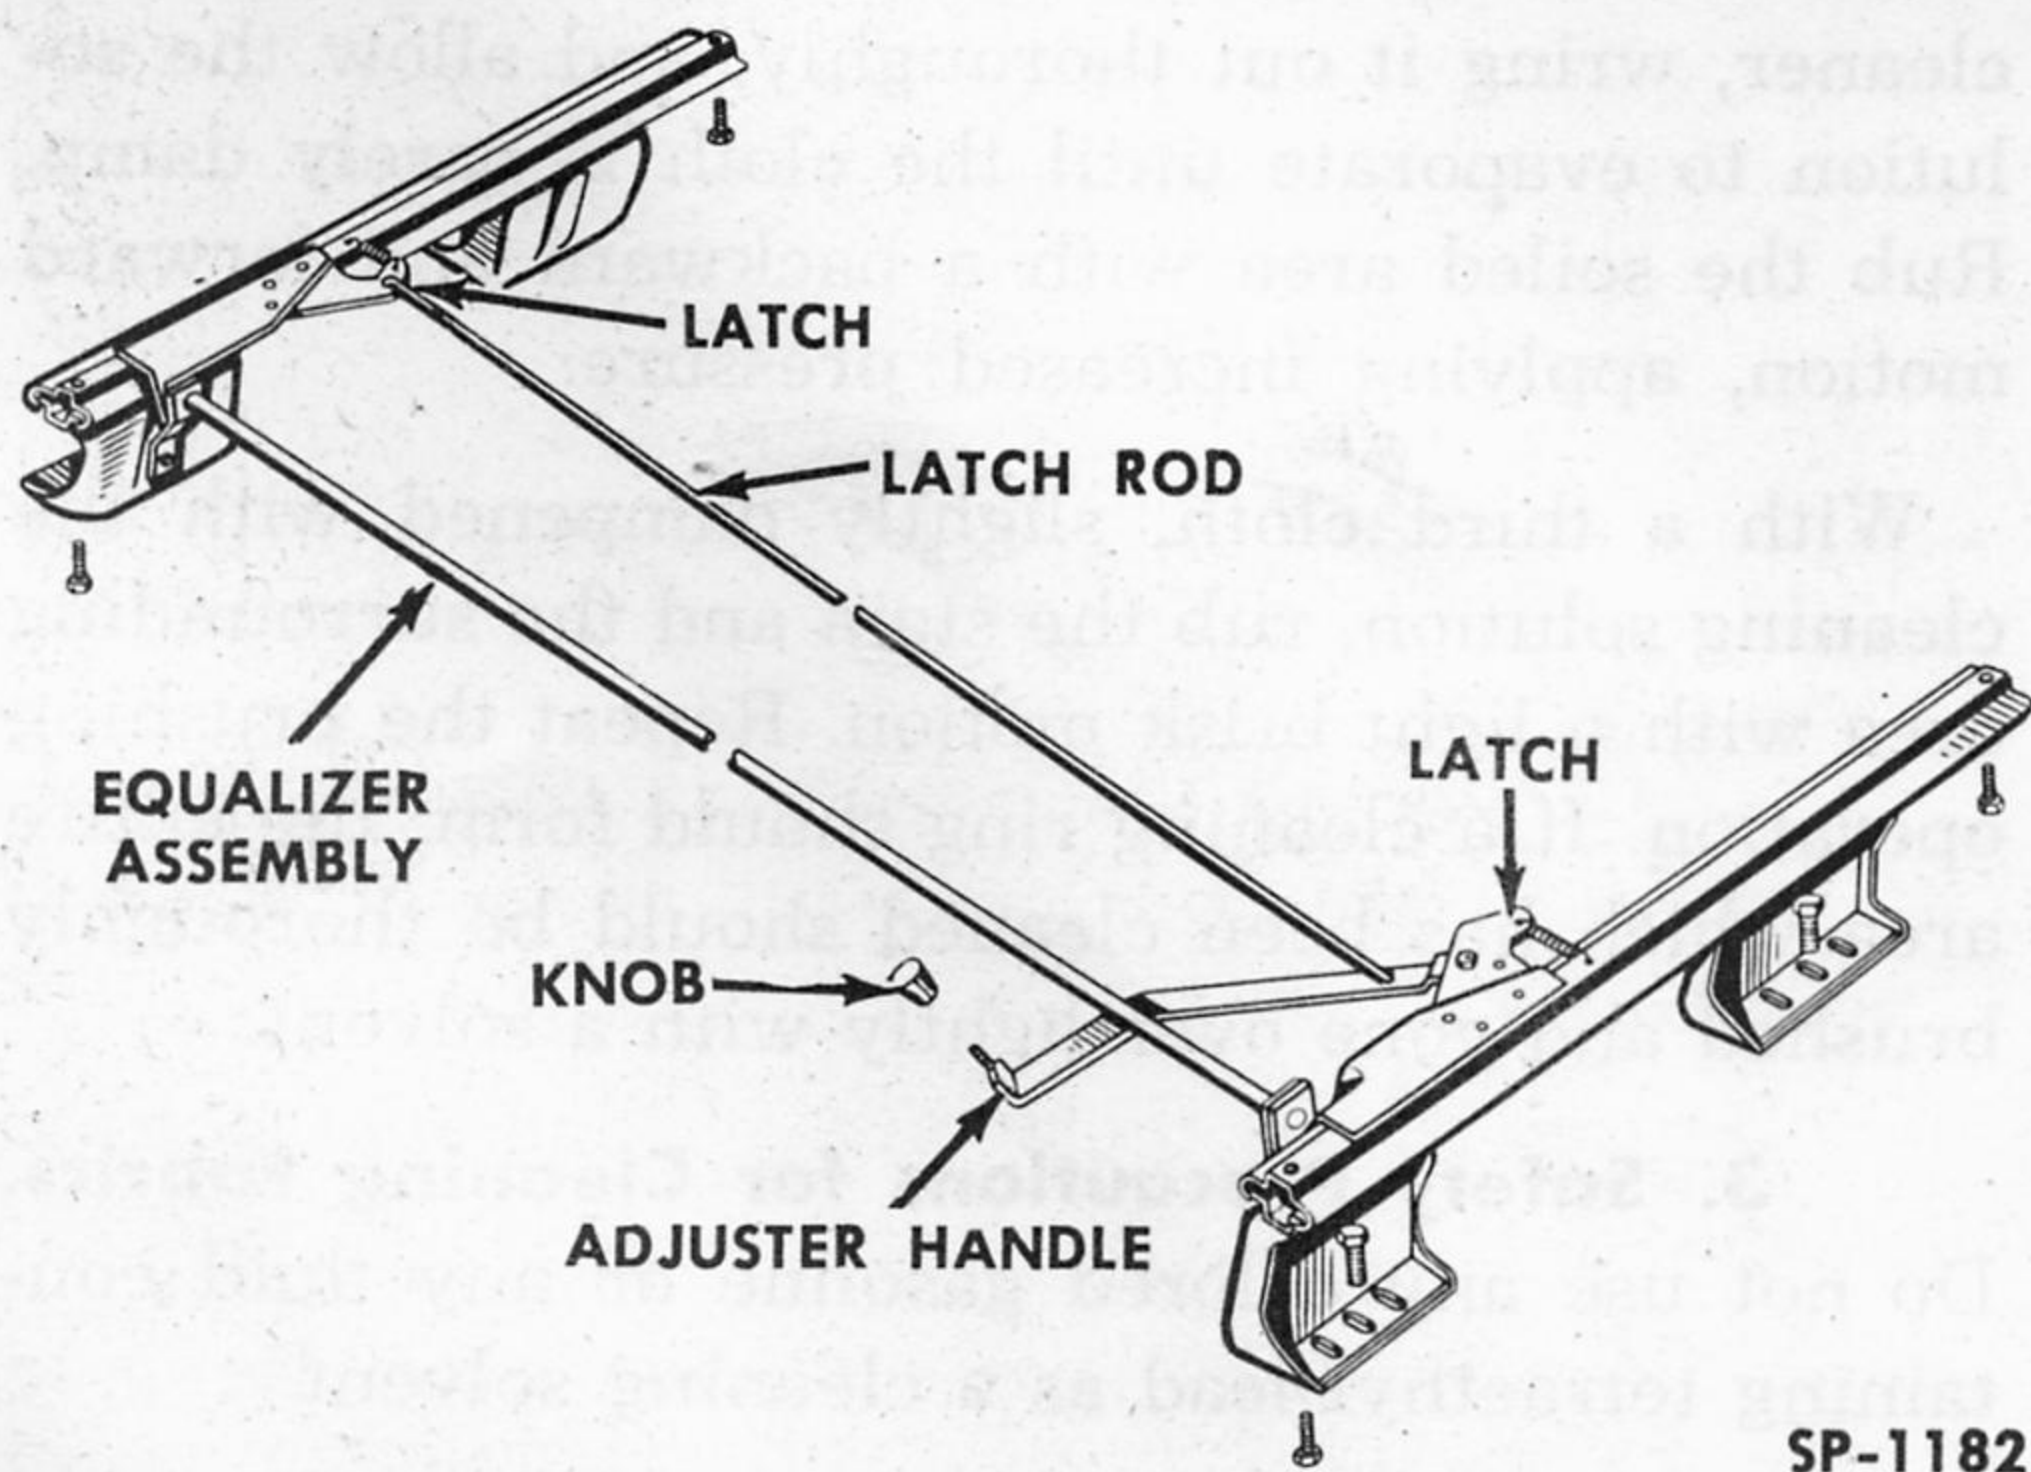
Front Seat Adjusting Mechanism—Kaiser
